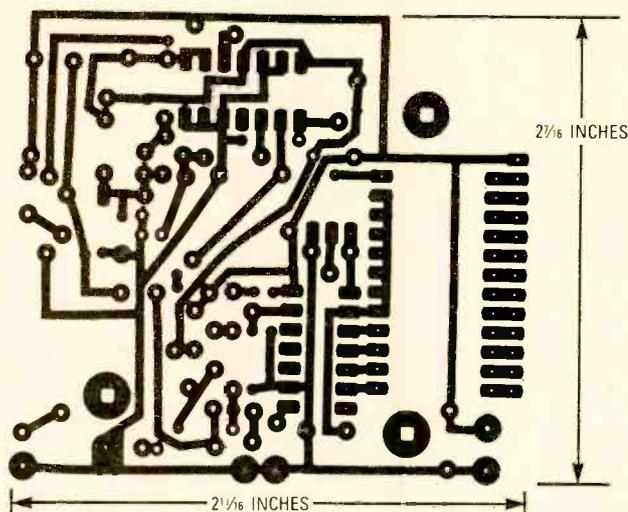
The Versatile Code Alarm was assembled on single-sided printed circuit board; the template for that board is shown here.
